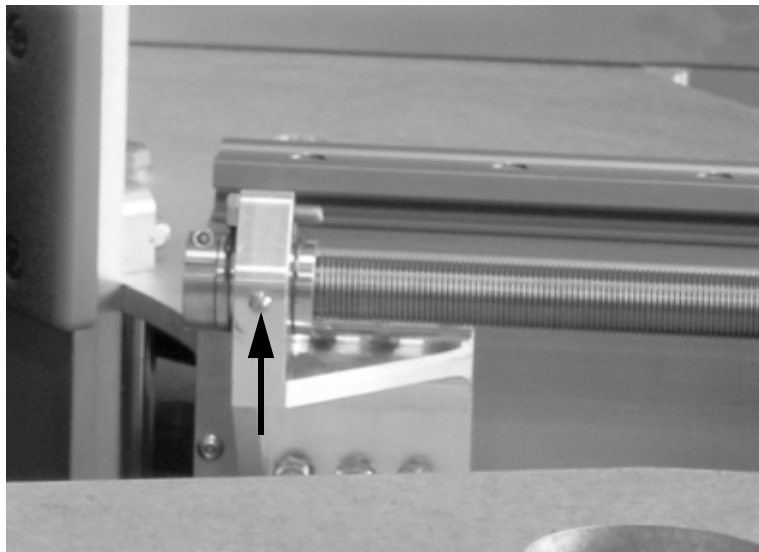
Grease the fitting at the bottom of the feed screw.
